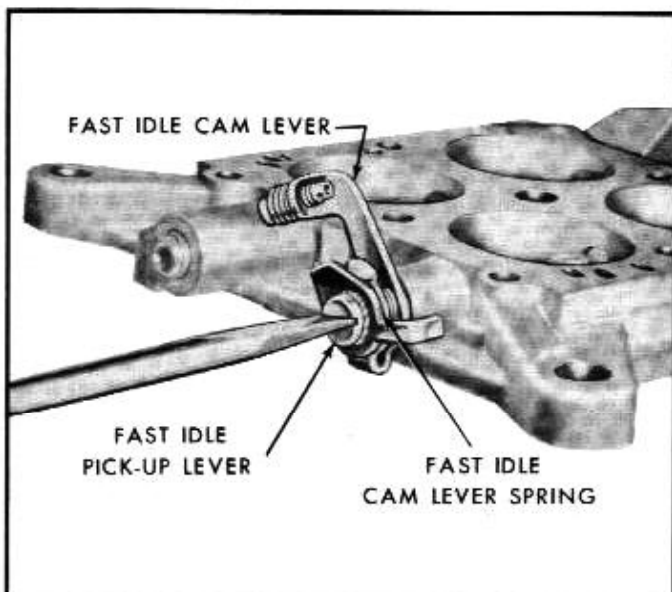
D-43—Removing Fast Idle Cam Lever Screw
